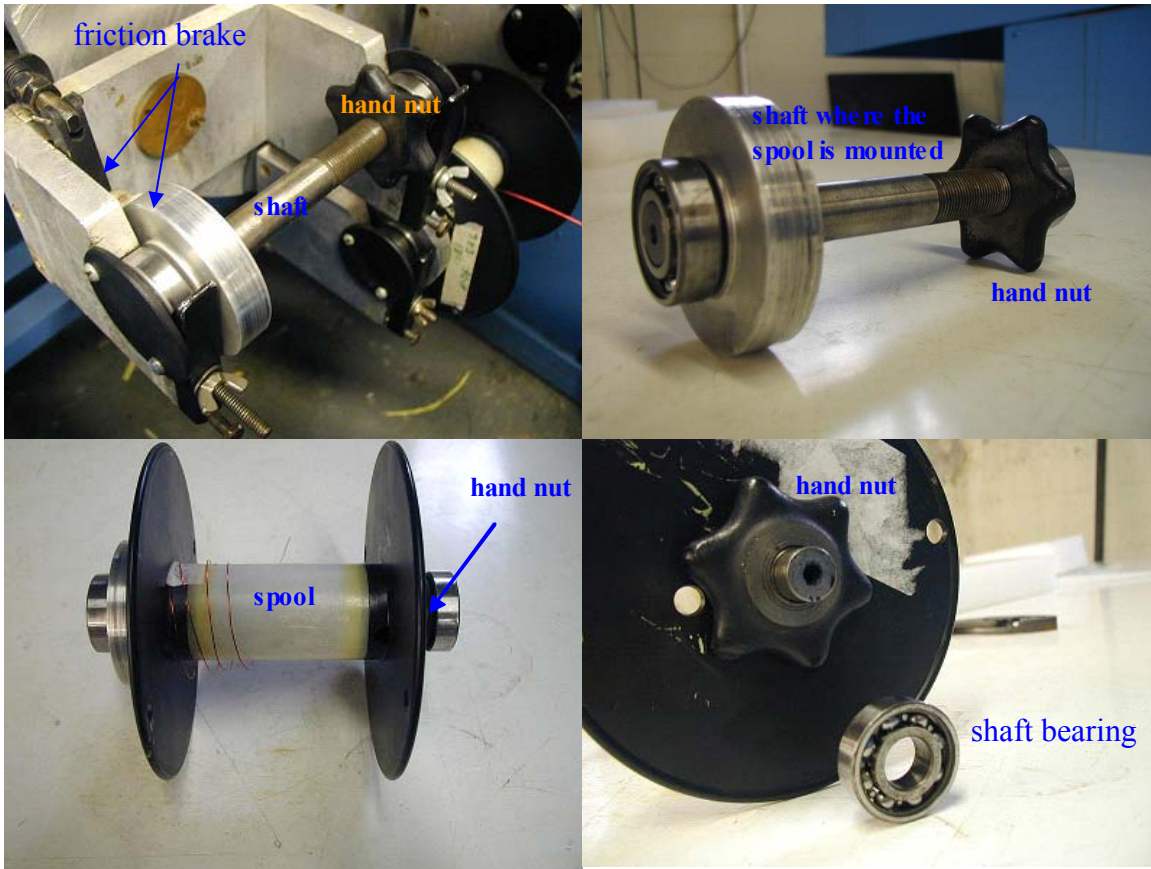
Details for one of the shafts which support the spool in the cabling machine.
